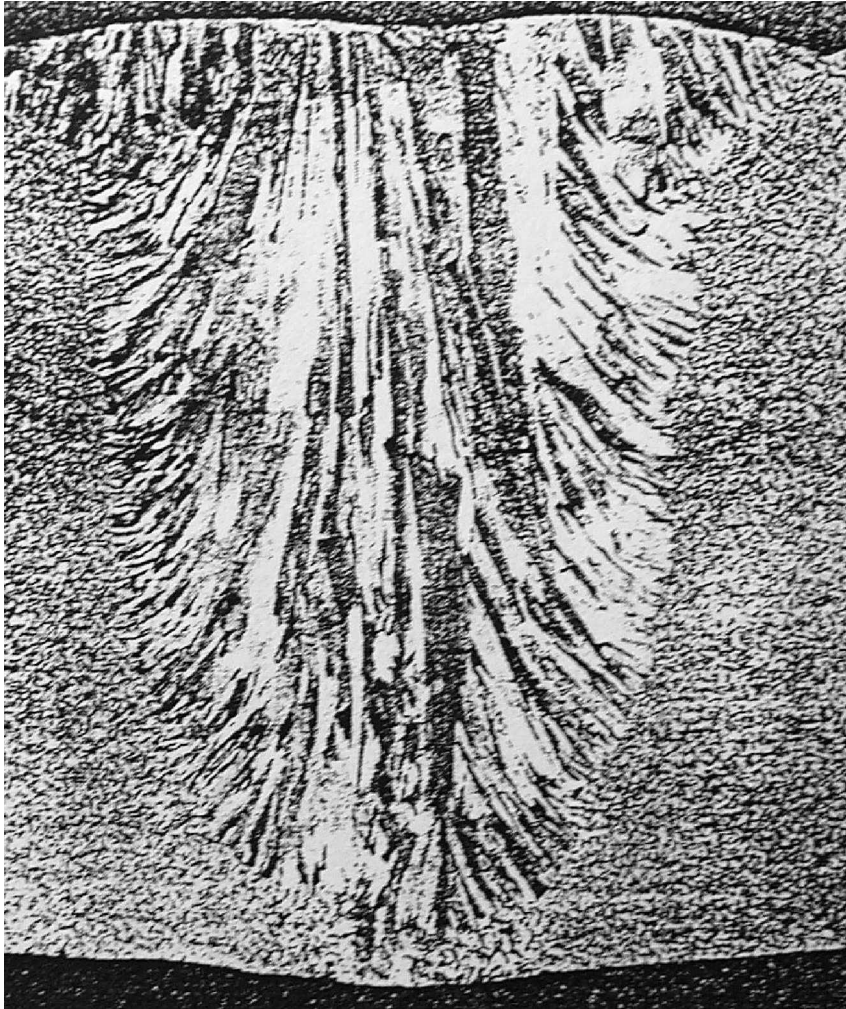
The grain direction adjacent to a weld fusion face is perpendicular to the fusion face (example of a Shielded Metal Arc weld)
